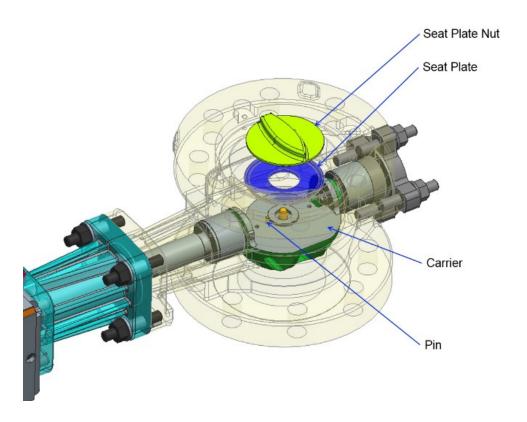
Reposition the Valve Assembly, Orient the Seat Plate
